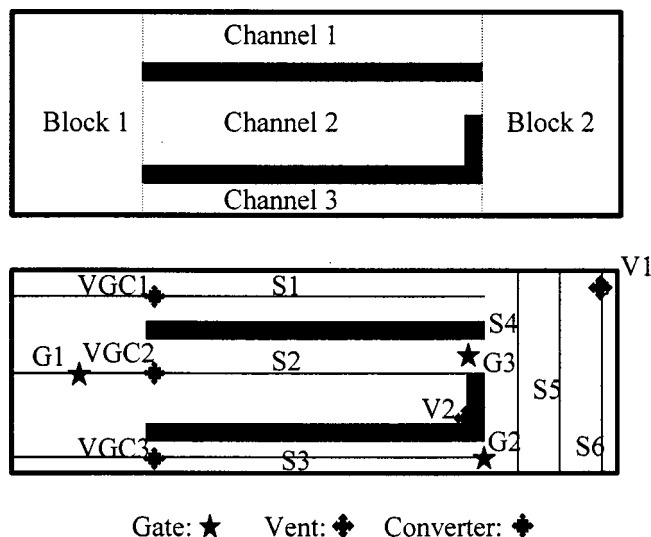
Top: the sub-domains of mold A. Bottom: location of control elements and lineal sensors in mold A.
